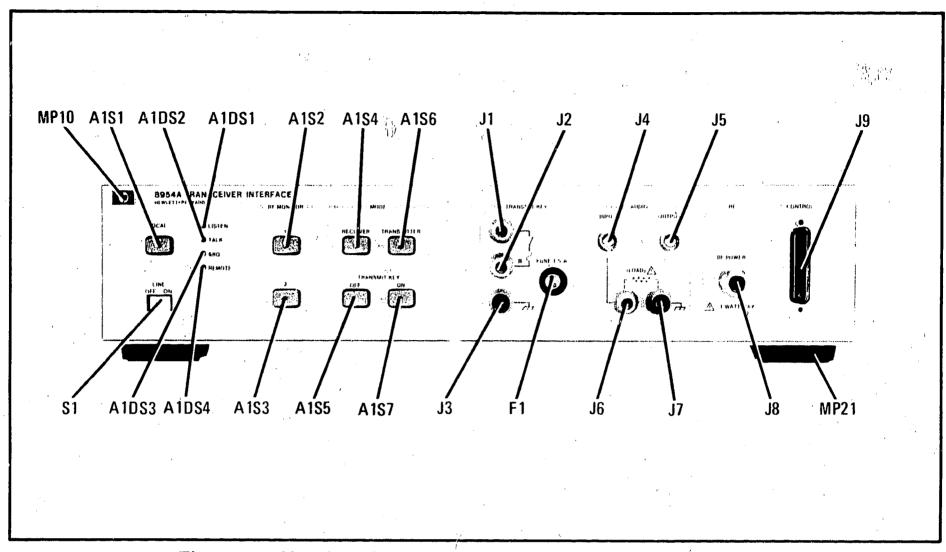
Chassis and Mechanical Parts Identification—Front Panel
